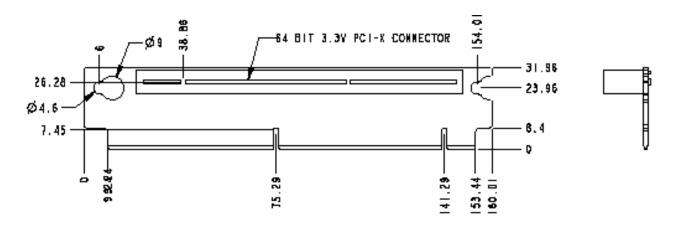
1U Full-Height PCI-X Riser Card Mechanical Drawing
